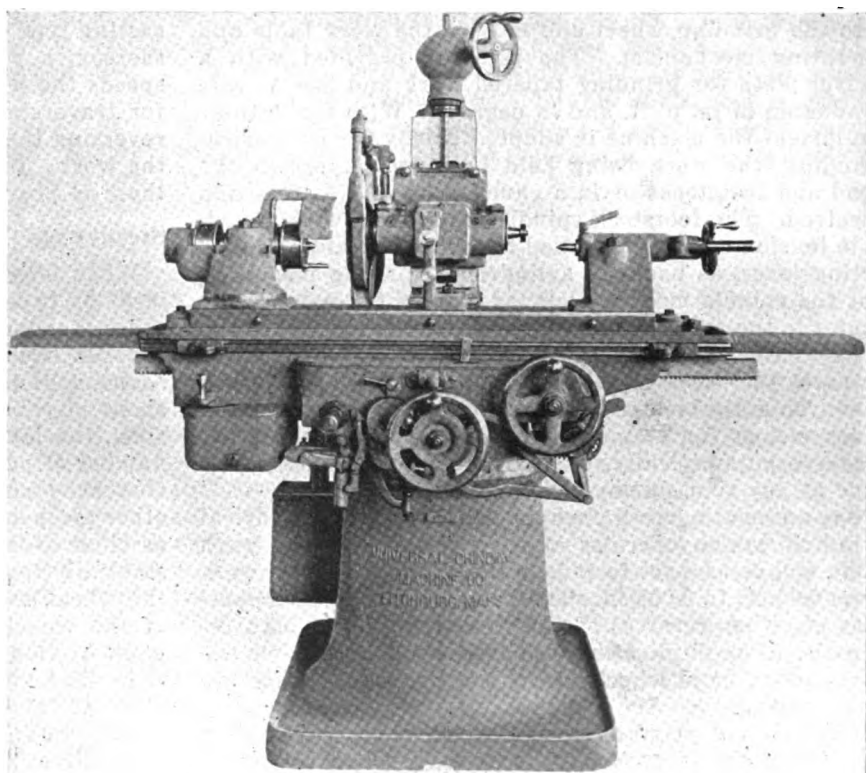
A typical universal grinding machine equipped for cylindrical grinding
